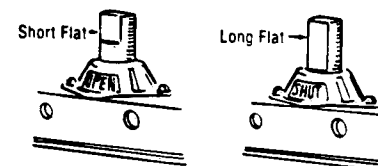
PINION ASSEMBLY ORIENTATION.
